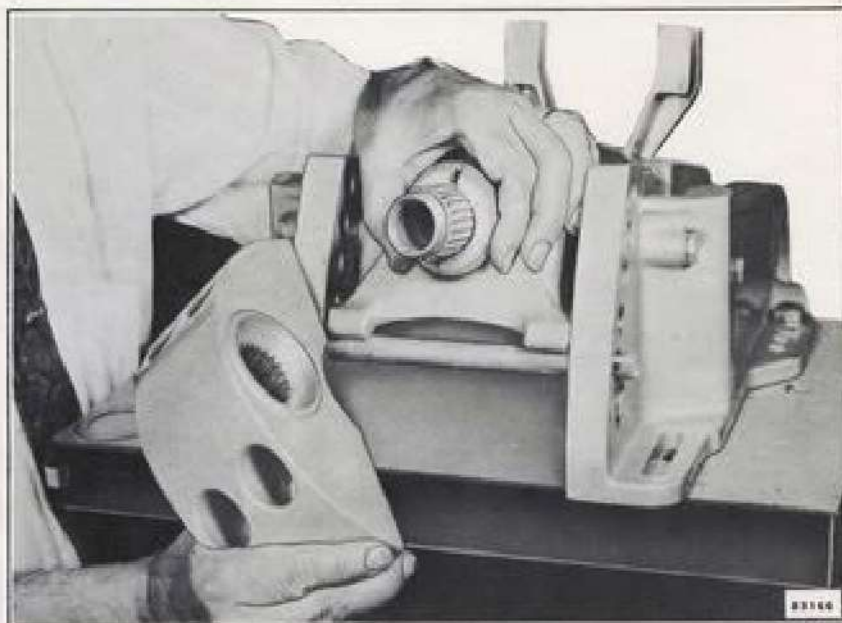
Pivot Shaft Splines (Long Shaft)
